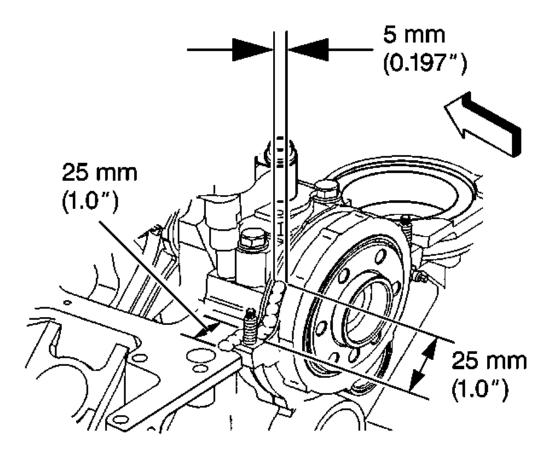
Applying Adhesive To Right & Left Sides Of Rear Oil Seal Housing Courtesy of GENERAL MOTORS CORP.
